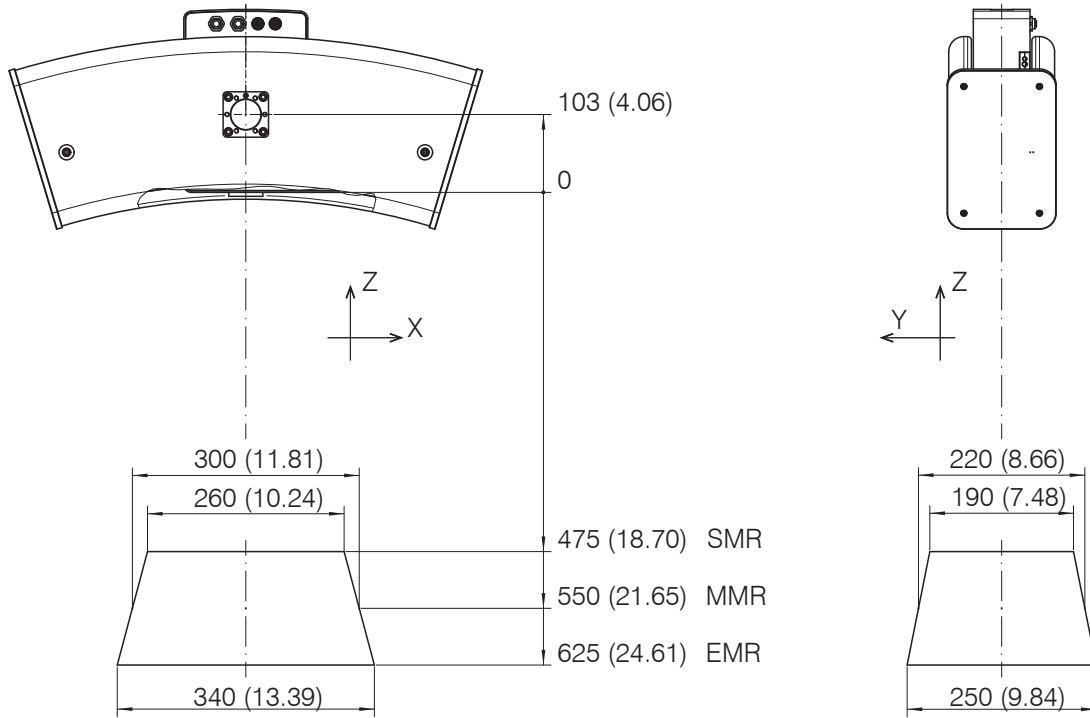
Dimensional drawing of surfaceCONTROL 3D SC25x0-300 measurement area, dimensions in mm (inches, rounded off)
